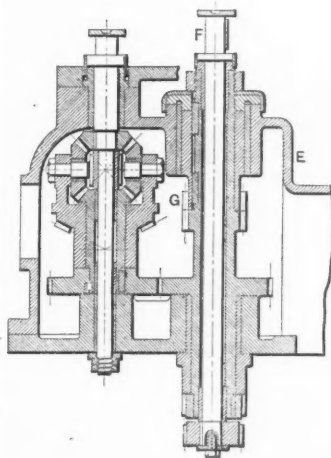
Gearing provided to give Required Lead for Worm Thread
